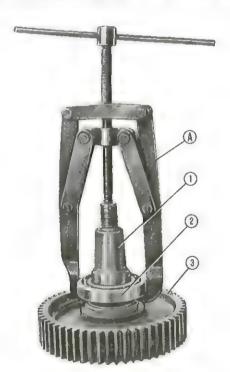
Extraction of the drive wheel shaft bearing with a universal type puller.
